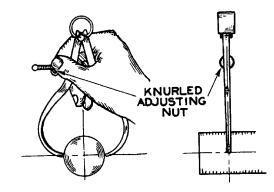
TAKING A MEASUREMENT WITH AN OUTSIDE CALIPER
